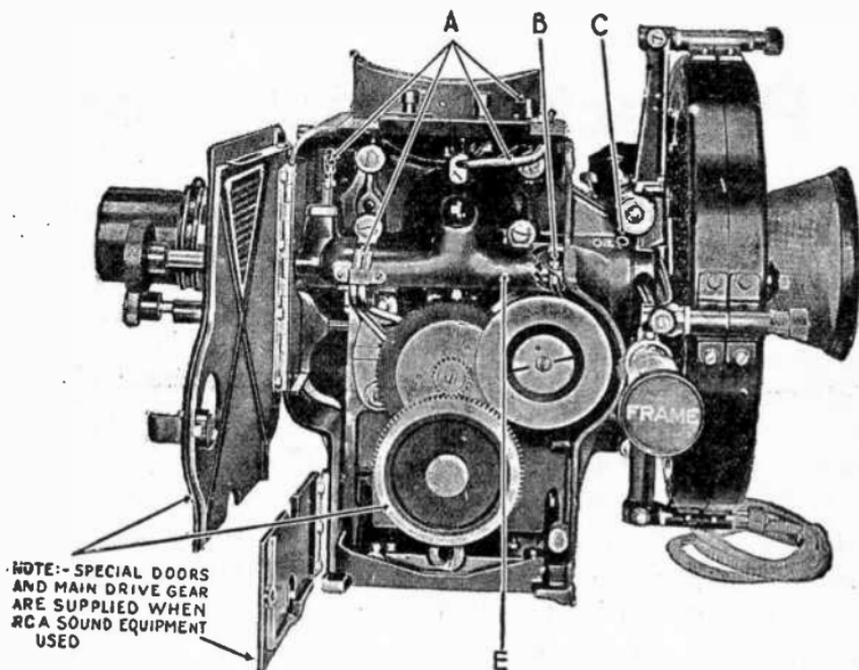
,822.—*Super-Simplex oiling system.* Oil intermittent casing as follows: Set the framing handle to the position which brings the red line of the oil sight to a horizontal position; in the shutter shaft support casting E, just above the fly wheel of the intermittent movement, will be found a window or hole milled through the casting through which can be seen a portion of the shutter shaft. Just in front of the shutter shaft is the oil tube B, leading to the intermittent casing. This oil tube can be reached in one position only; this position is obtained by moving the framing handle as before directed. Enough oil should be inserted through this tube to bring the level in the oil case up to the red sight line, and no more, when machine is level; use judgment when projector is not level.
